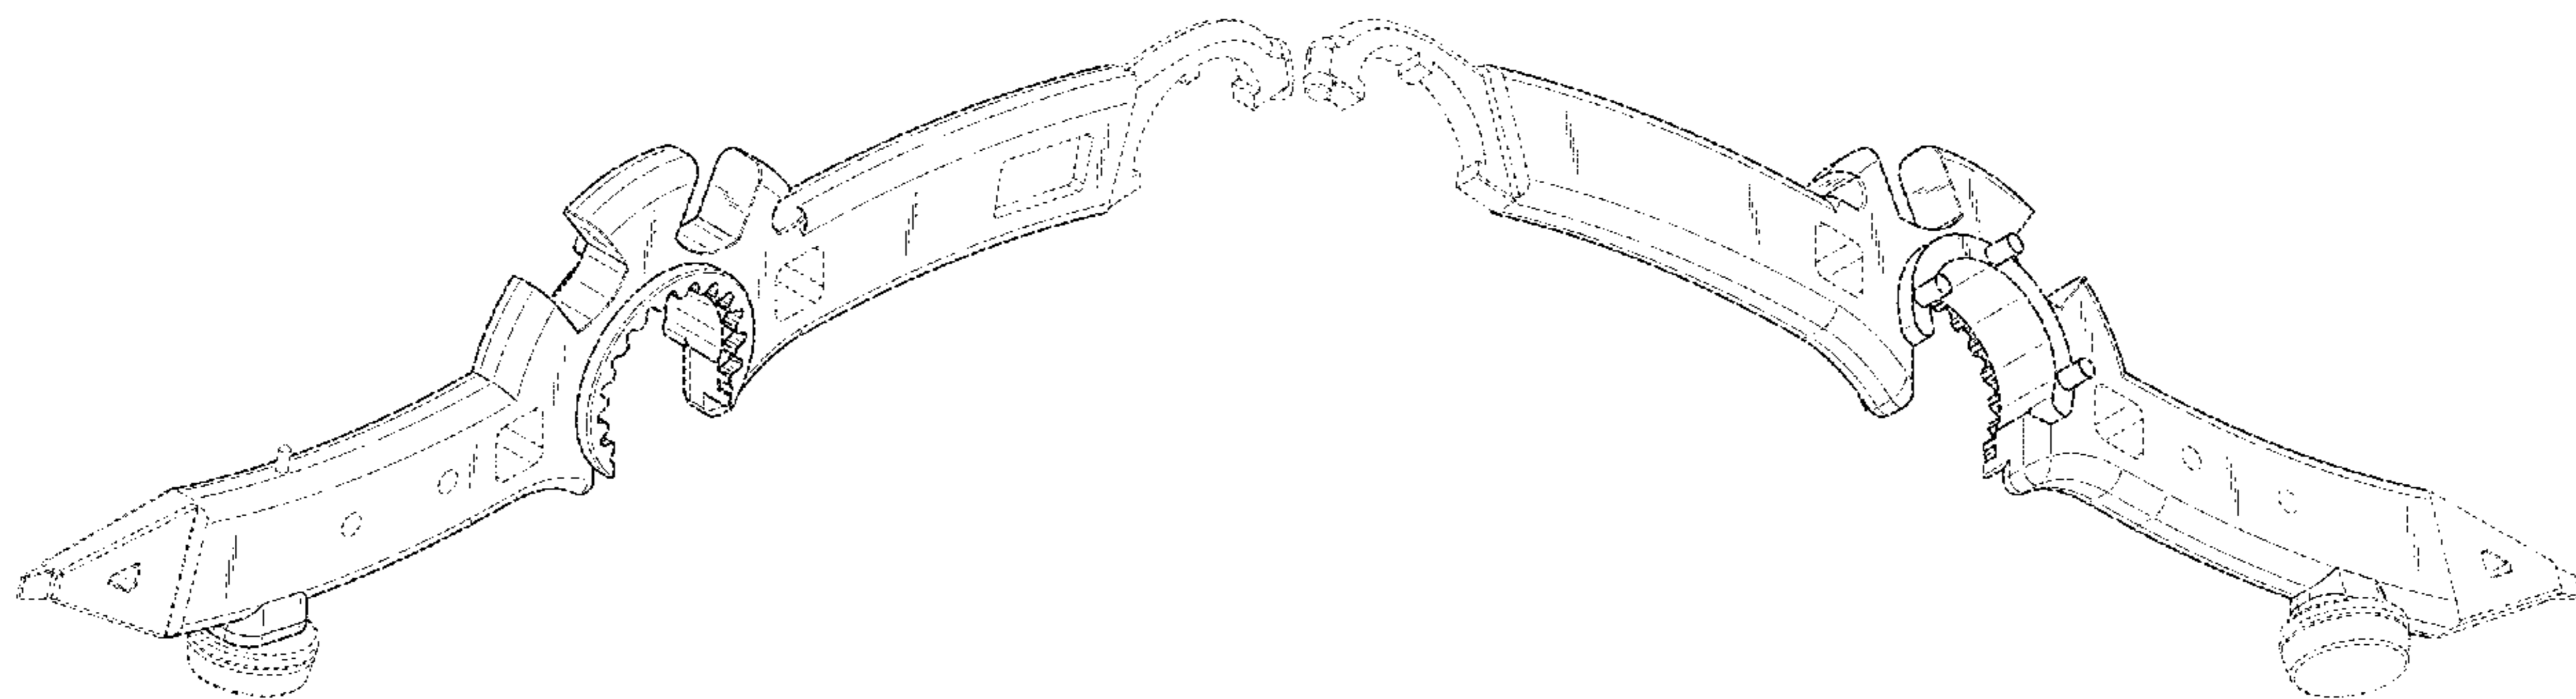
is a right-side elevational view of the multi-tool of FIG. 1.
